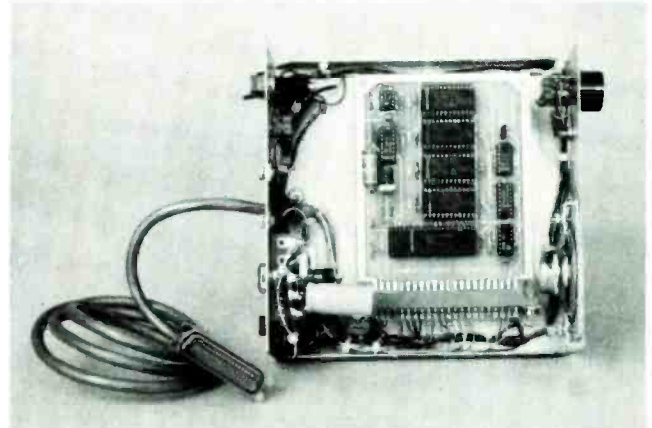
THE ASSEMBLED SYNTHESIZER with its cover removed.
